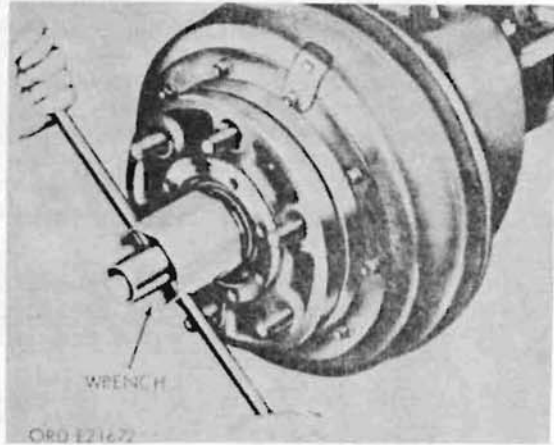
Wheel bearing adjustment using wrench 5120-974-2243
